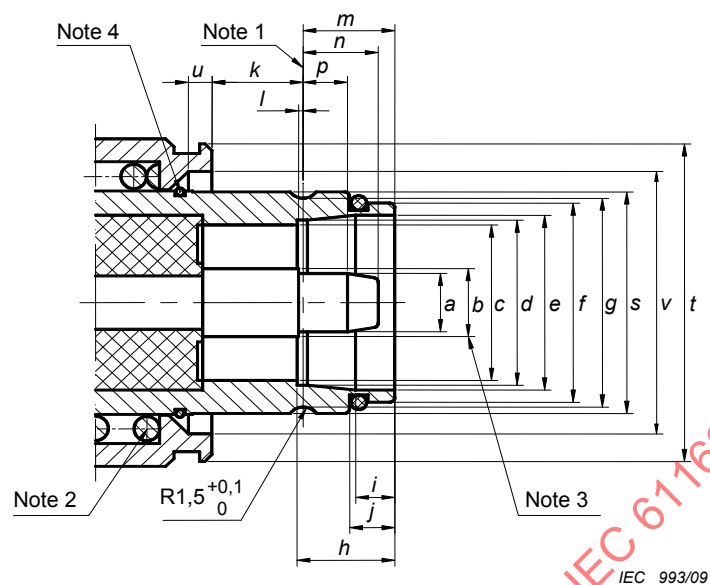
Connector with pin-centre contact (for dimensions, see Table 1)
